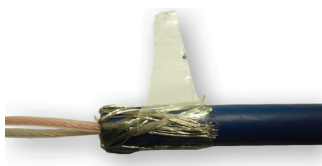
Adhesive tape on sensor cable/cable shield
